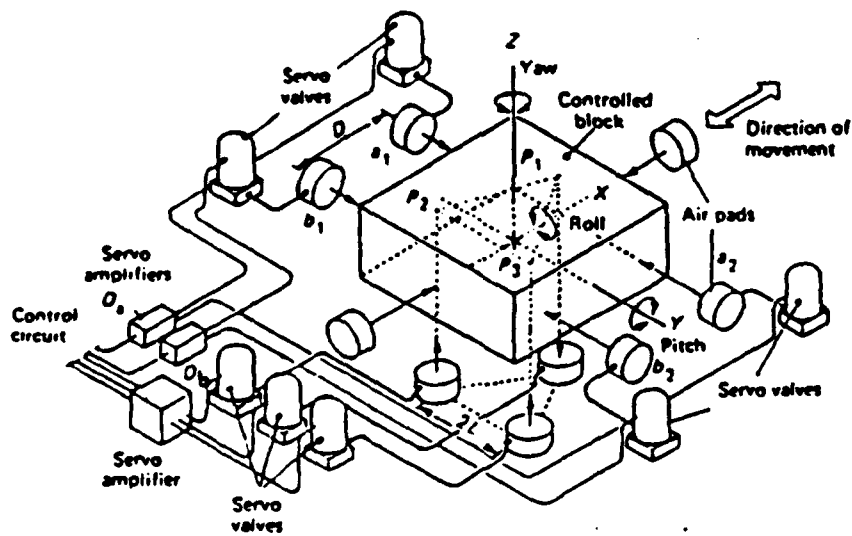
Pads, Servo Valves and Block Assembly. Ref. 7.
